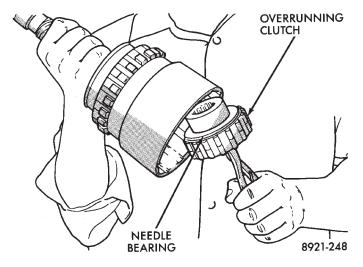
Overrunning Clutch Assembly Removal/ Installation
